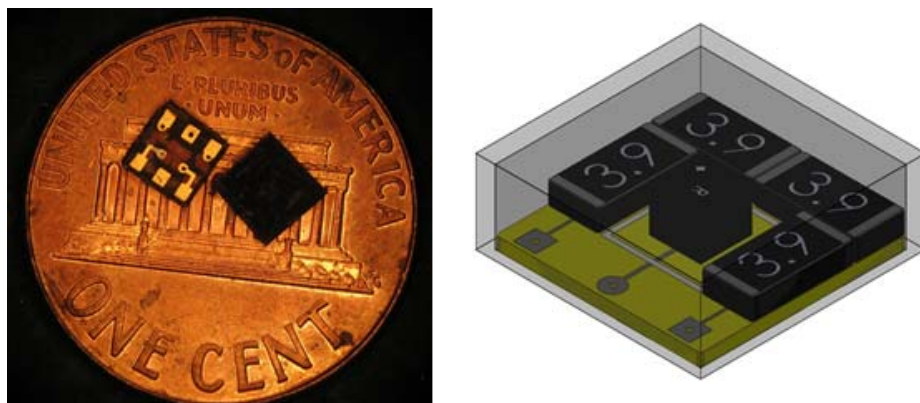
The Microfluidic Thermal Component in surface mount package
